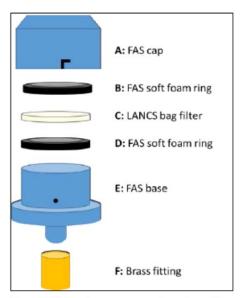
Two O-rings were placed on either side of the filter, since one O-ring allowed leakage.
